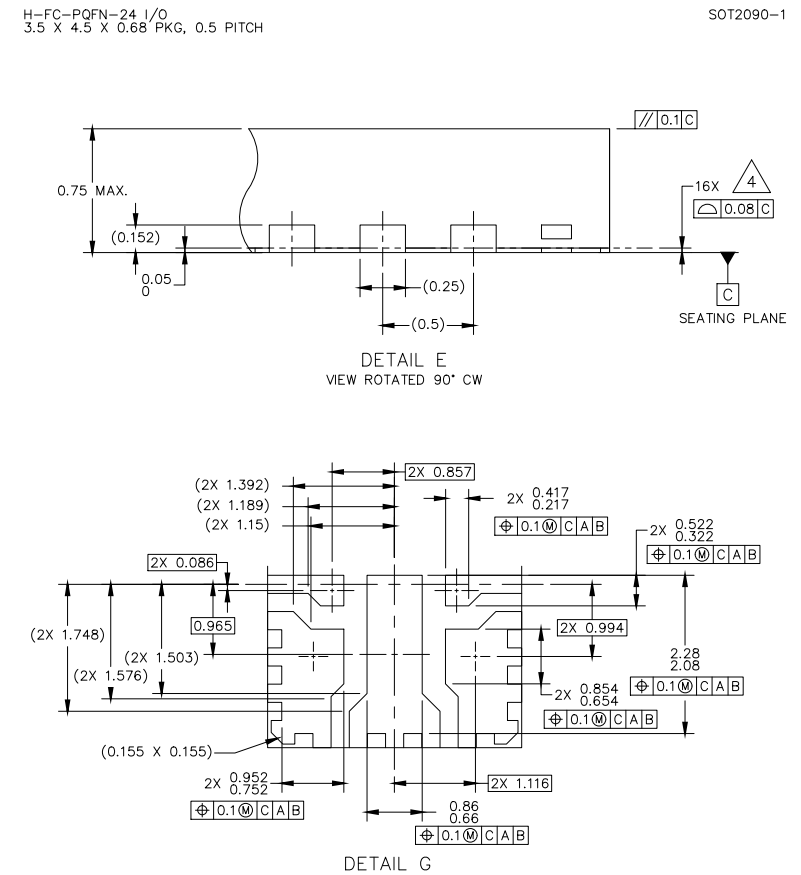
Package outline detail E and G of H-FC-PQFN24 (SOT2090-1)
